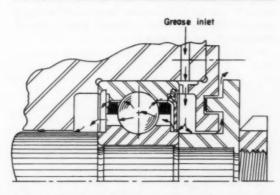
When relubrication of a bearing is necessary, a single-shielded bearing may be used as a metering device. Applied as shown here, the shield prevents overlubrication of the bearing. Excess grease is forced out through the labyrinth and serves to seal the labyrinth passages.
